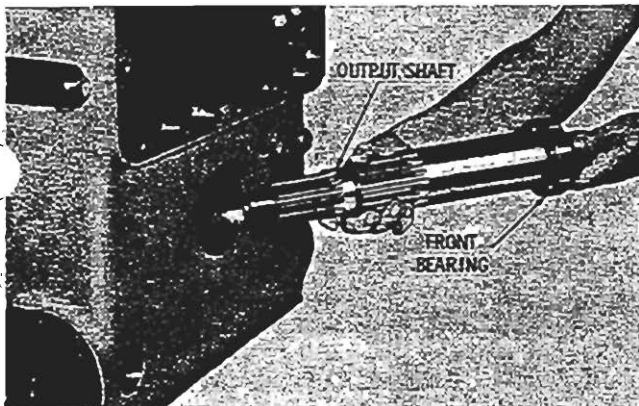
REMOVING ONE-PIECE OUTPUT SHAFT
